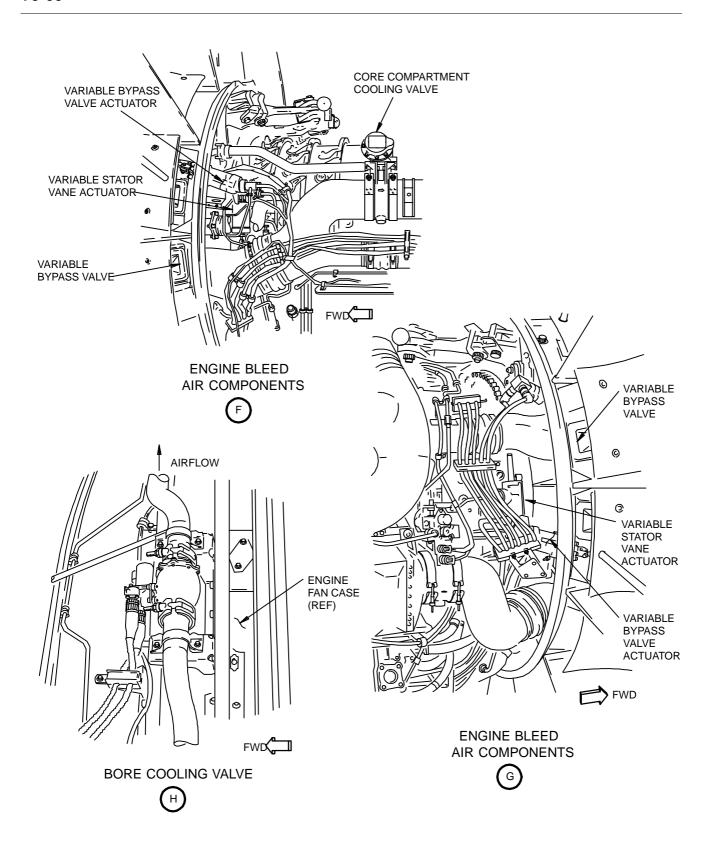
75-00 Air Component Location Fig. 102 (Sheet 2)
